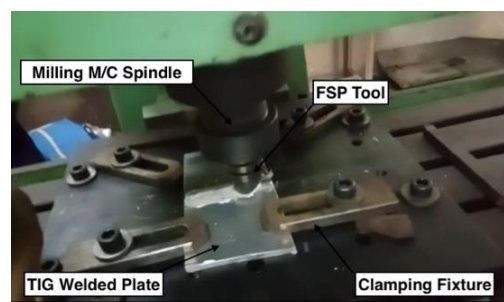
FSP Tool Having Cylindrical Pin ProfileFigure 3. FSP setup on milling machine
